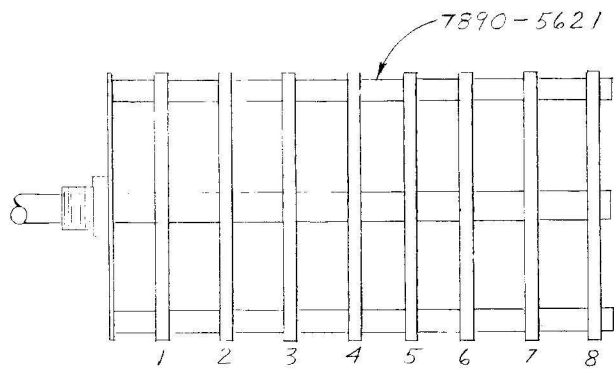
Capacitance parameter switch S503 layout drawing showing parts.
